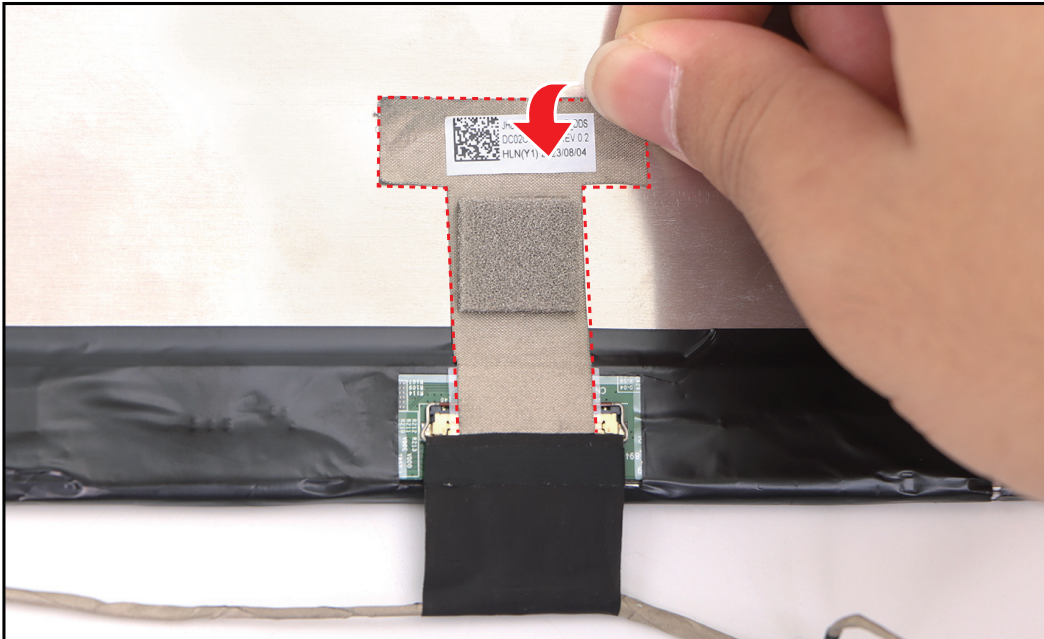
Detaching the Double-sided Mounting Tapes
